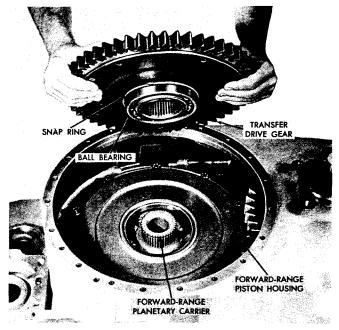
Installing (or removing) transfer drive gear assembly
